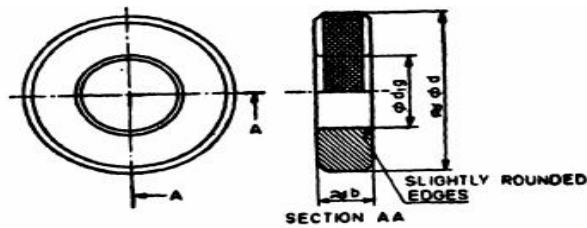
GAUGE FOR CHECKING MAXIMUM OUTSIDE DIAMETER OF SOCKET-END
